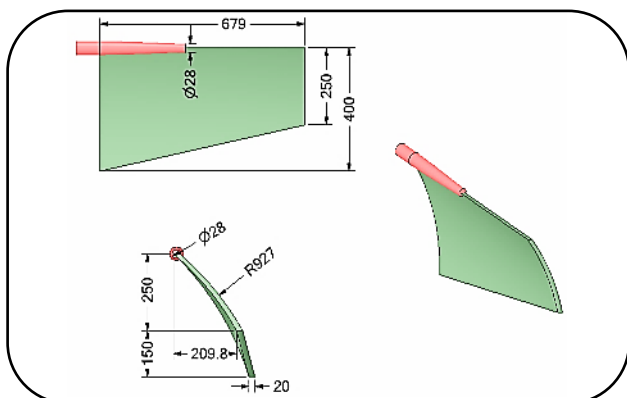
Geometric details of curved impeller blade for design A (dimensions in mm)
